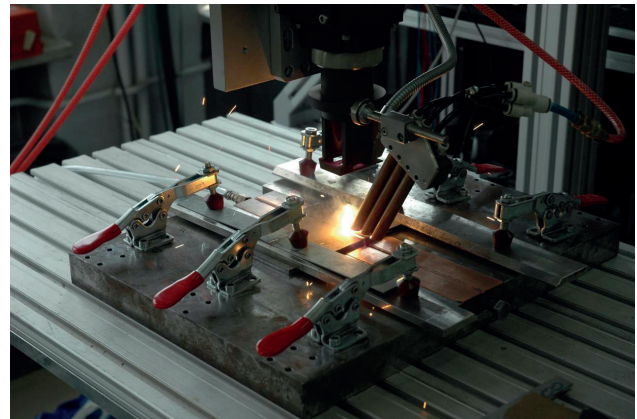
A view of the bead-on-plate welding of steel S700MC plate by the Disk laser
